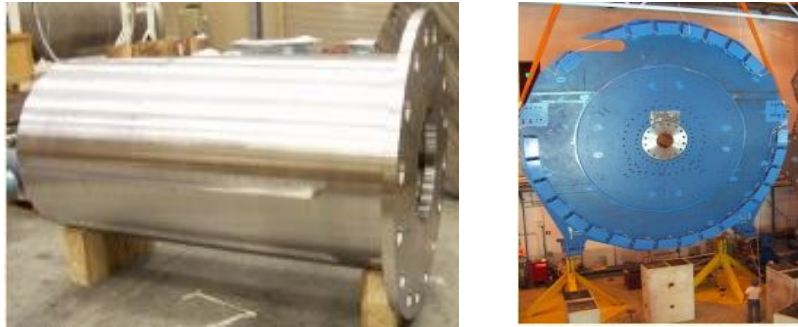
Left: The stainless steel tube. Right: The front of the JD shielding (IP side). [63]
